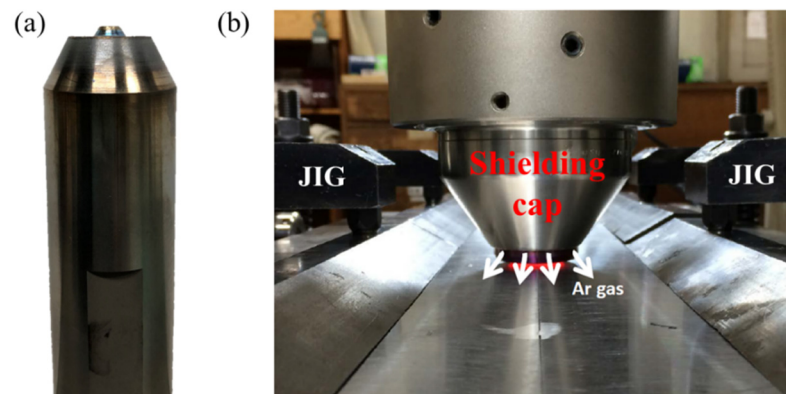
The photograph of (a) the tool used for friction stir welding in this experiment and (b) the pneumatic JIG and cap type local Ar shielding system.
